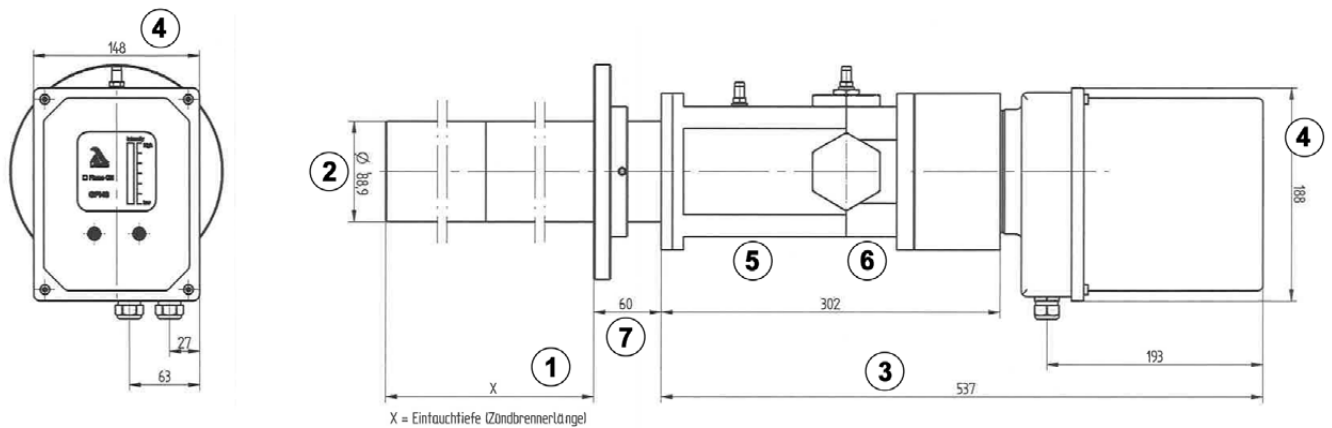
Dimensions of GFI89 pilot burner design A/B
